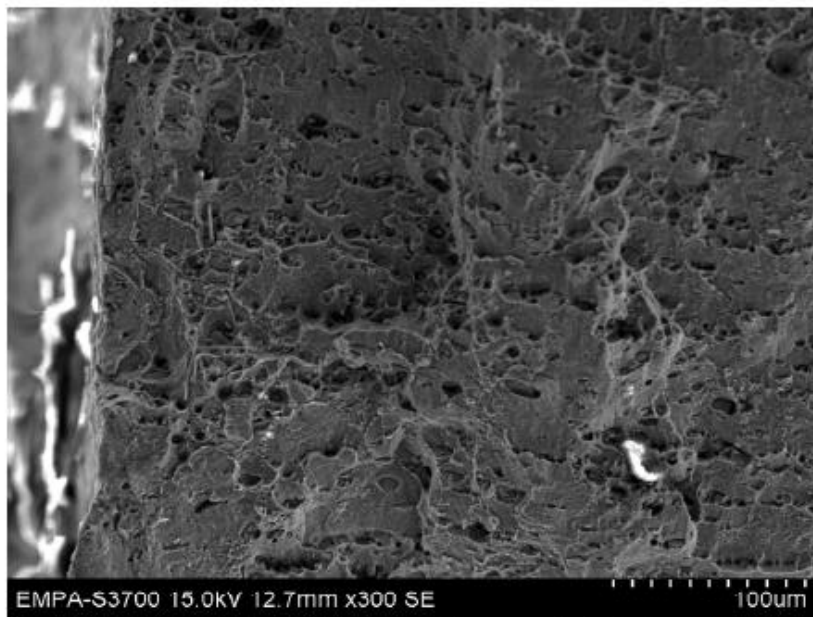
Detailed view of Figure 7 at higher magnification – a dimple fracture can be observed (ductile overload fracture)
